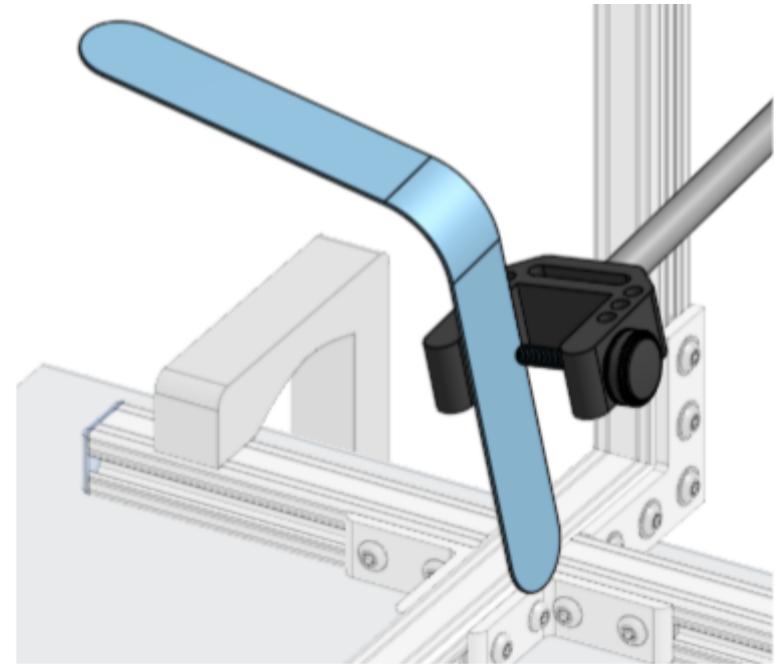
The malleable retractor can be locked in place by using a C-Clamp mechanism.
